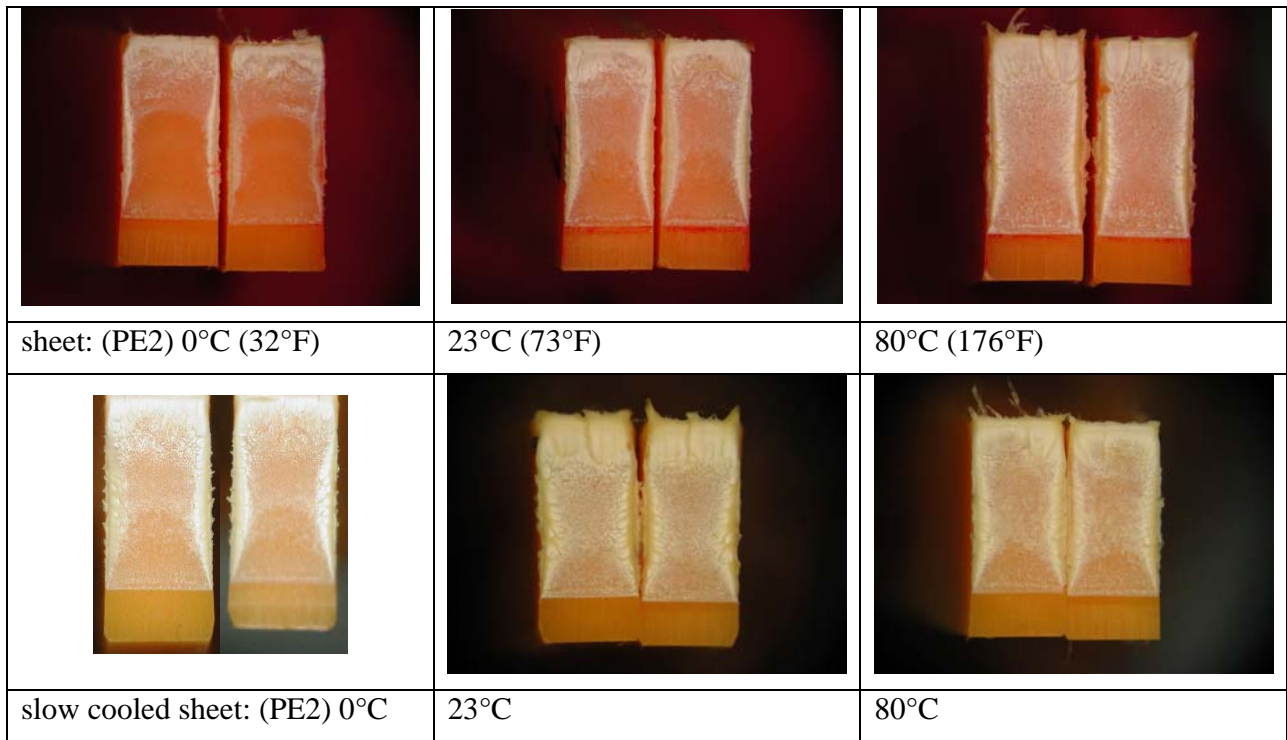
3PB fracture surface of PE2, sheet samples at 0°C, 23°C and 80°C
